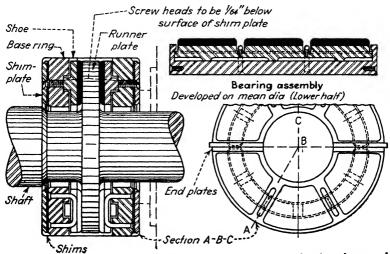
Thrust-bearing assembly with developed section showing absence of load equalizer.
